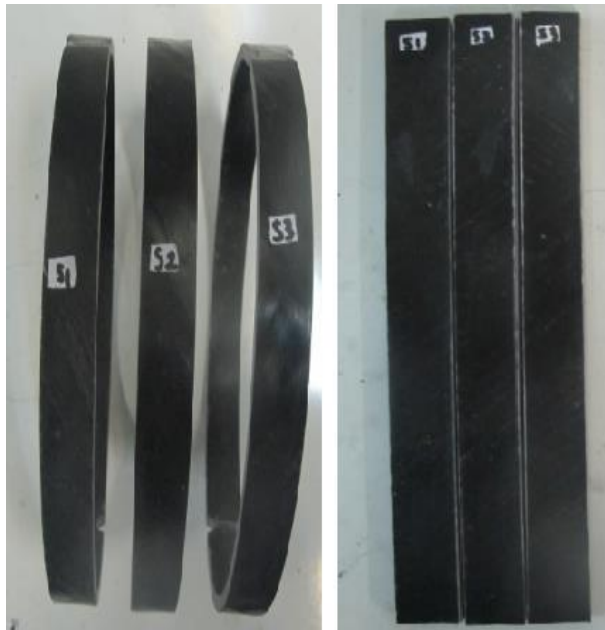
The hoop specimens (left picture) and longitudinal specimens (right picture)
